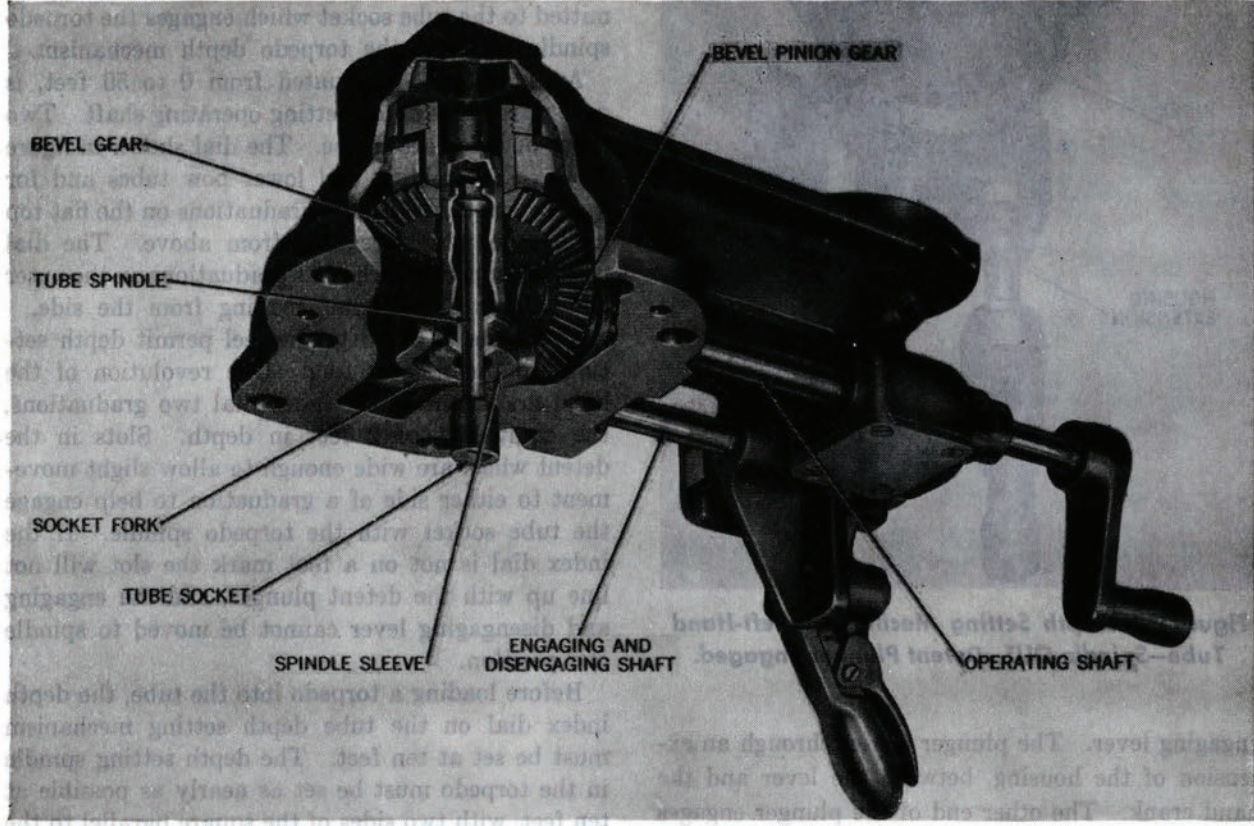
Depth Setting Mechanism—Spindle IN—Sectional View.
